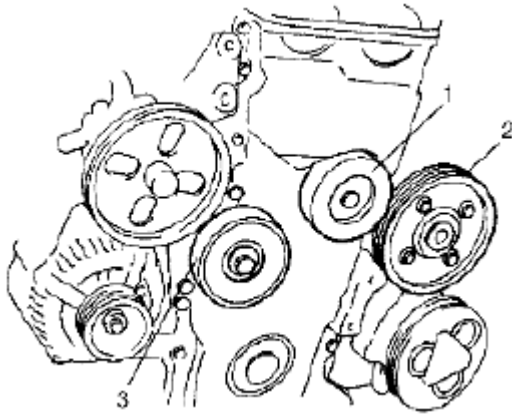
Identifying Idler Pulley, Water Pump Pulley & Belt Tensioner
